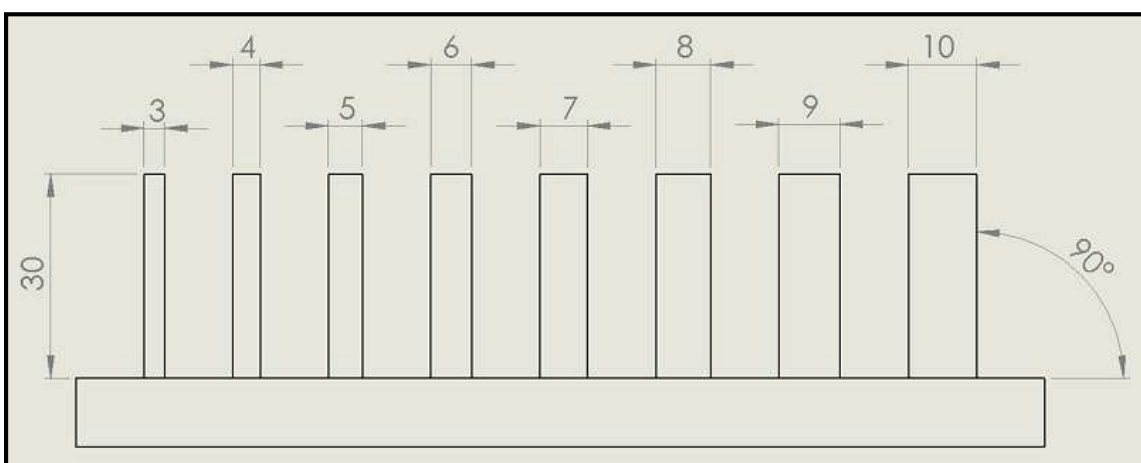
Test geometry 5: 2-D CAD drawing – with dimensions
